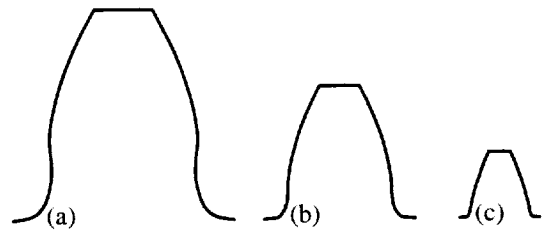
Gear tooth shapes, pitch radius, $r_p=1.75$ in.
